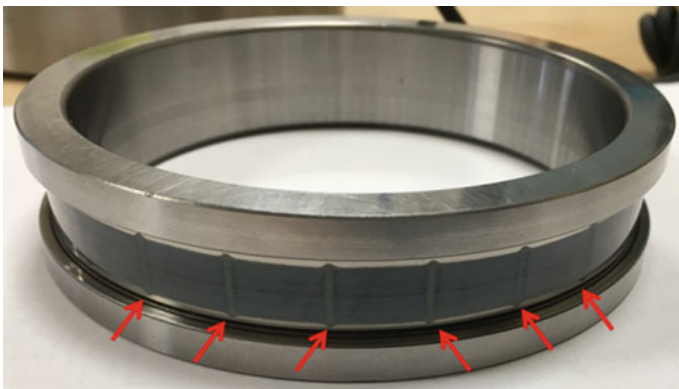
Wear on the inner race of the cylindrical roller bearing
